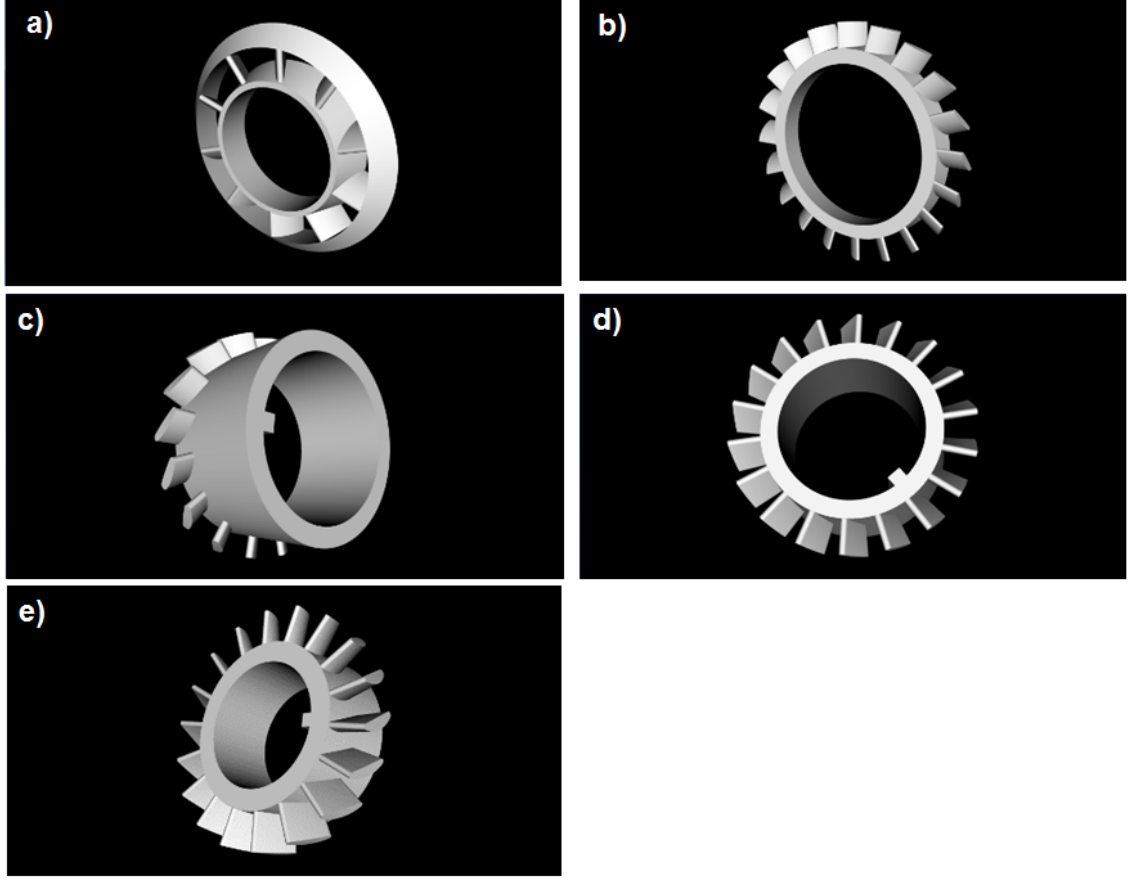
3D printed jet engine replica with representative assembly parts affording different recognition complexities: (a) Rear Bearing (b) Exhaust Turbine (c) Third Compressor (d) Second Compressor (e) First Compressor.
